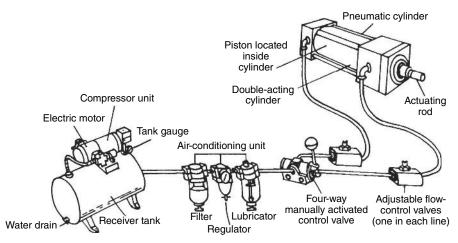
Pneumatic system and pneumatic cylinder. The piston and actuating rod are pushed forward by air pressure.
